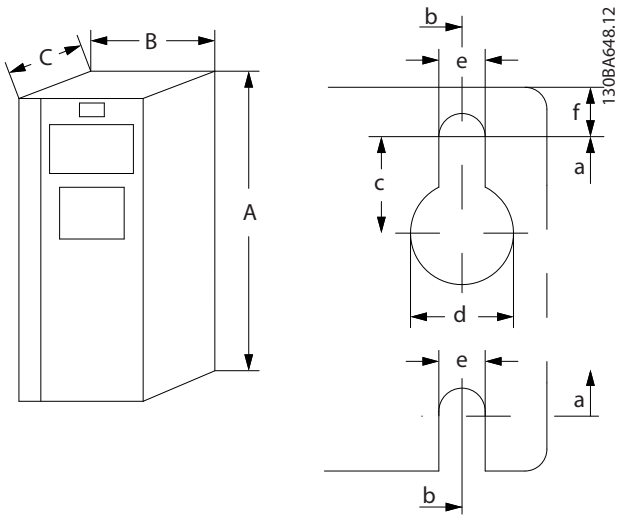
Top and Bottom Mounting Holes (See chapter 8.9 Power Ratings, Weight, and Dimensions)
